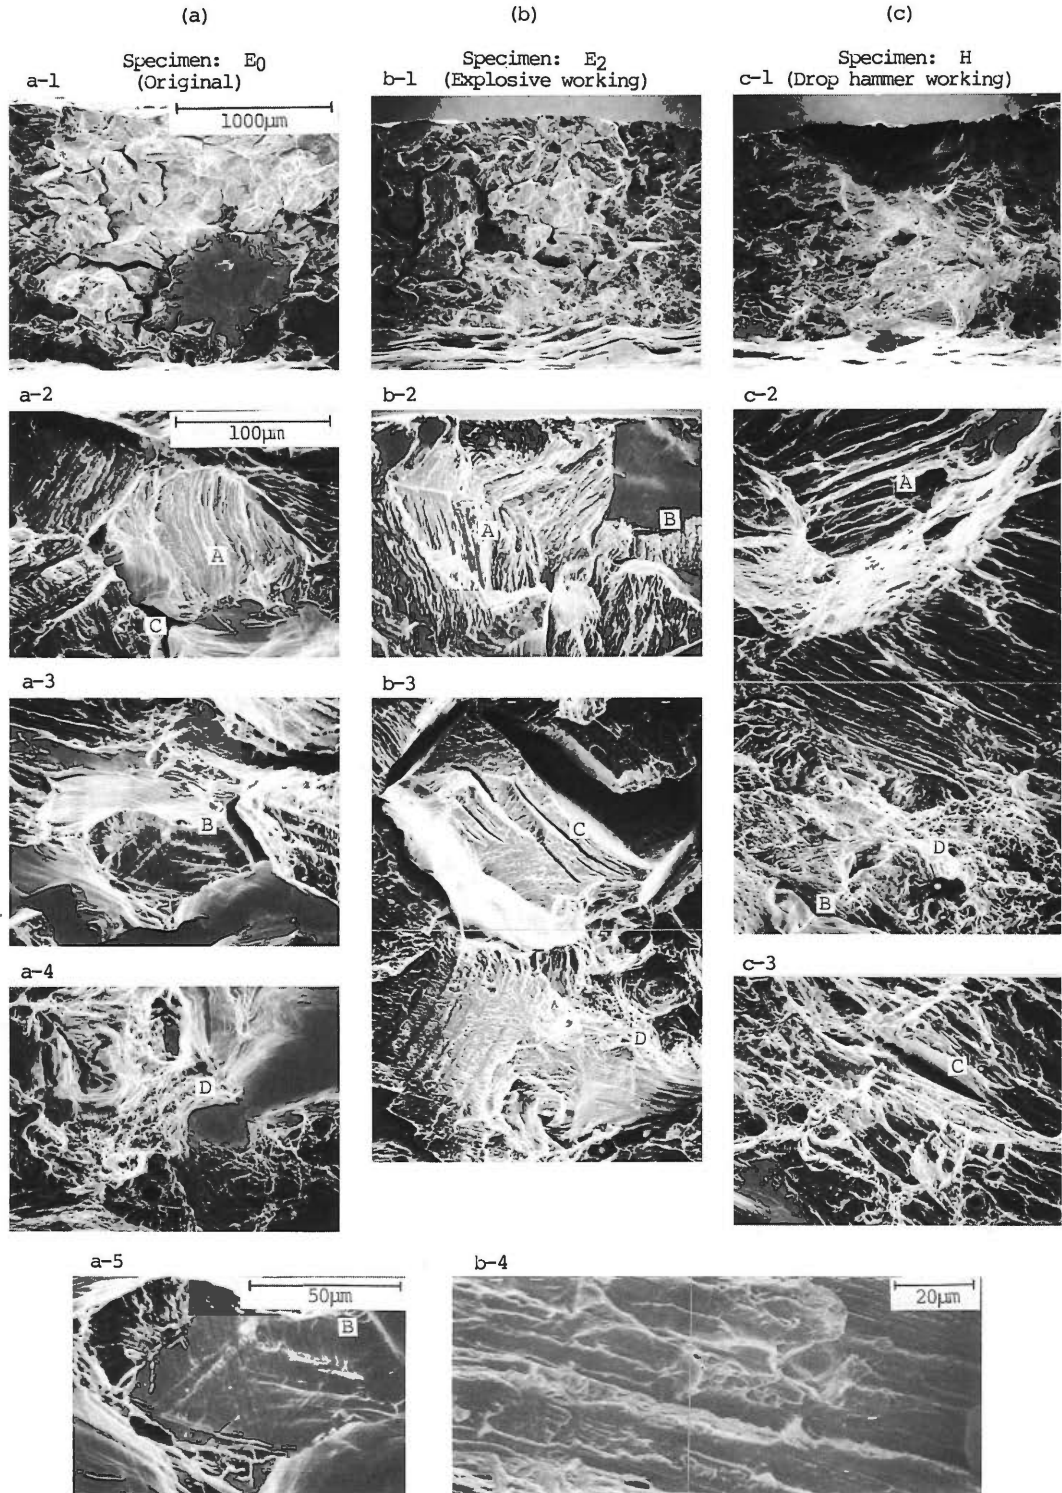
SEM photographs of tensile-test fractures for original, explosion and drop hammer hardened specimens.
